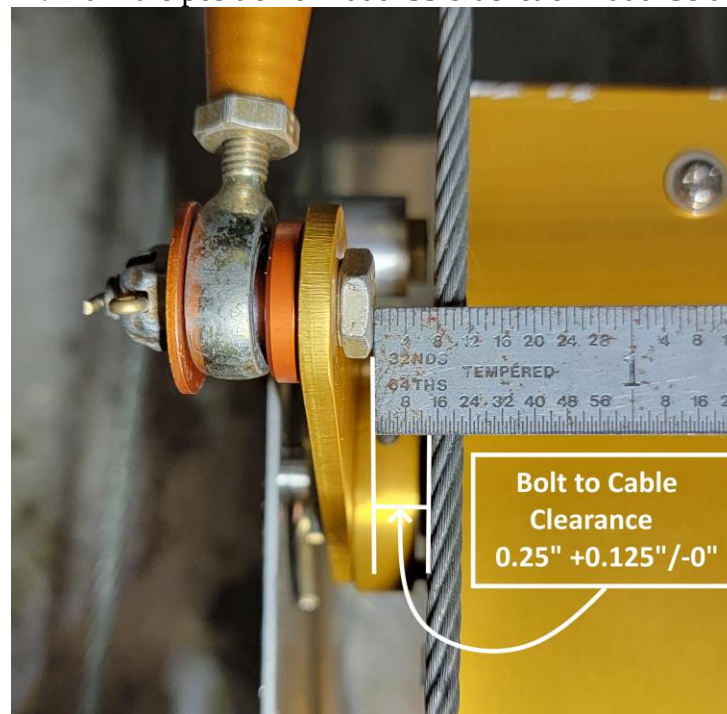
BOLT TO CABLE CLEARANCE
